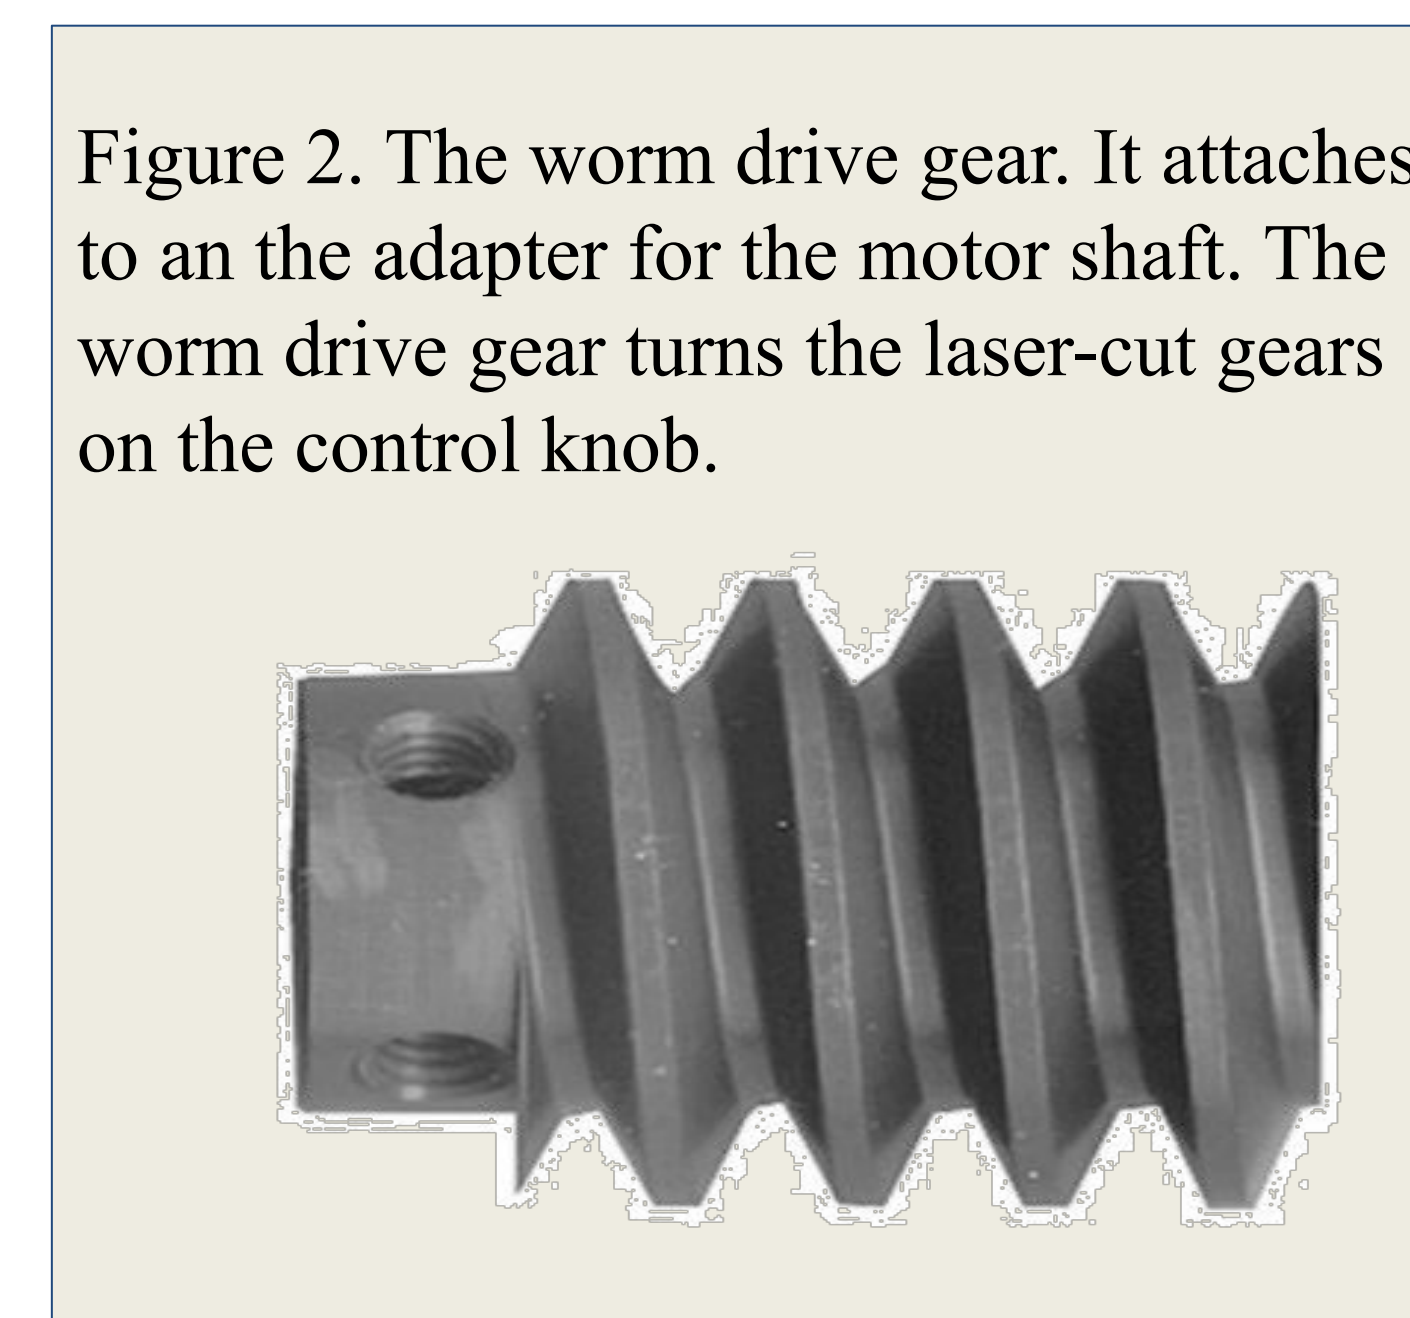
The worm drive gear. It attaches to an the adapter for the motor shaft. The worm drive gear turns the laser-cut gears on the control knob.
